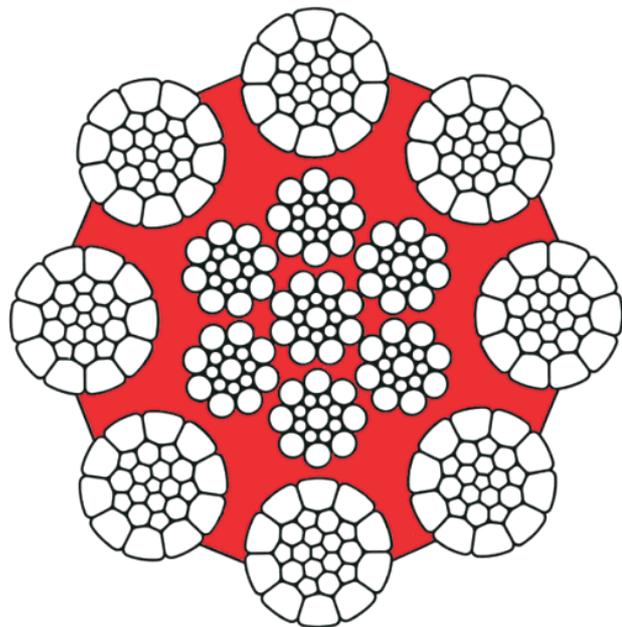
Cross-section of a TURBOPLAST rope typically used on drum winders and Koepe winders up to suspended lengths of 1000 m.
